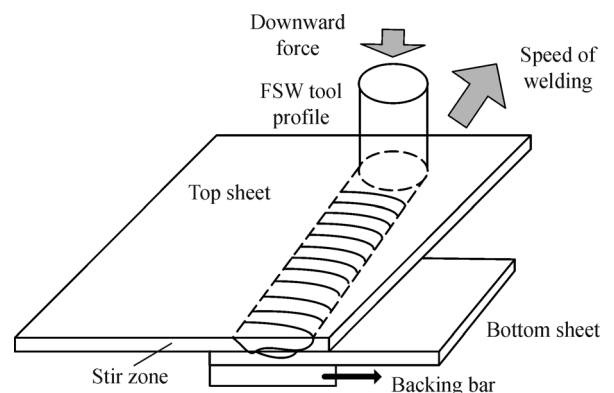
Mechanism of the FSW process at the top and bottom sheets
